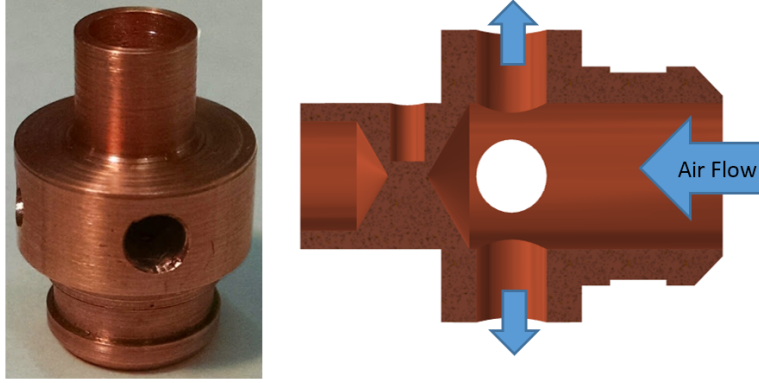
Cooling element: manufactured part (left) and solid model cross section (right).
